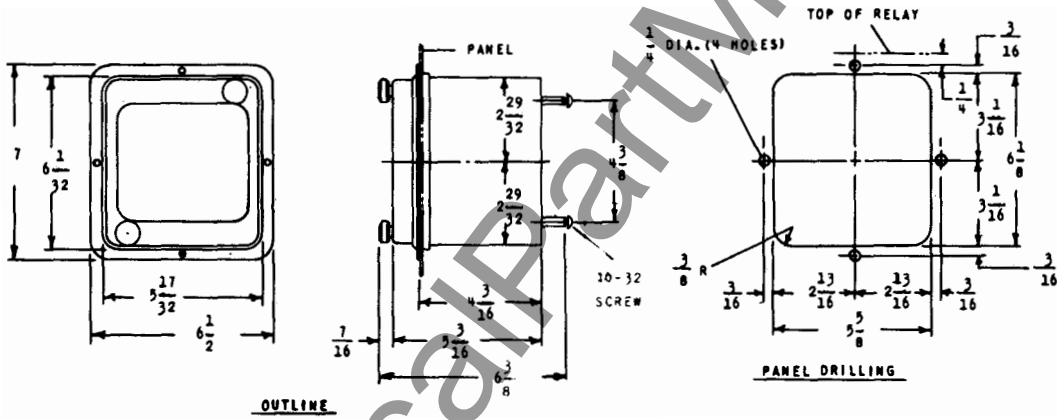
Outline and Panel Drilling Dimensions for Type HFA Relays in "F" Case
